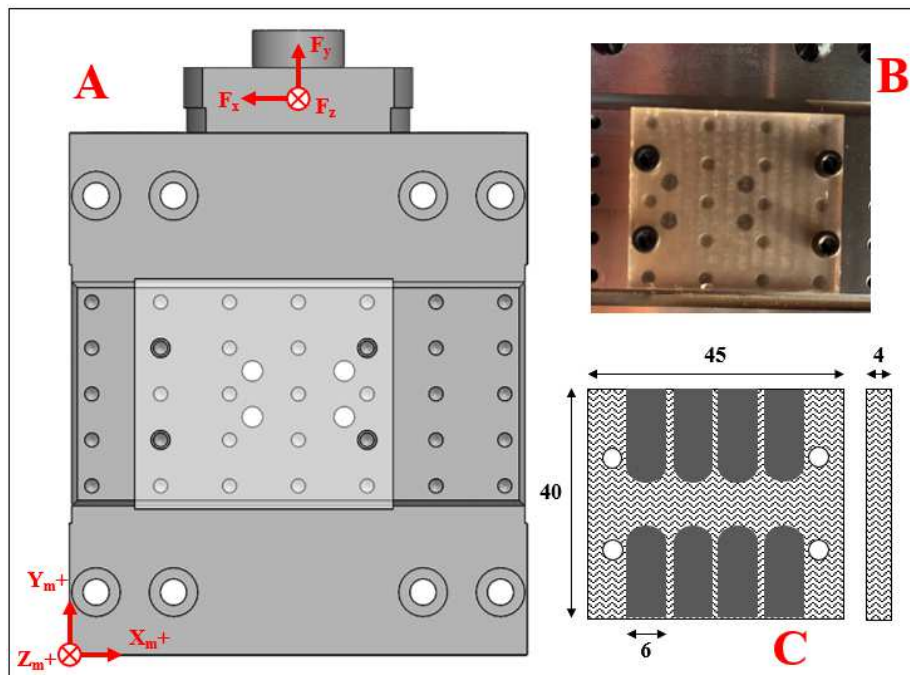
CAD diagram of a PLA milling block fixed on the KISTLER sensor (A), photograph of the PLA block on the cutting forces sensor (B), geometry of a block after machining with 8 slots (C)
